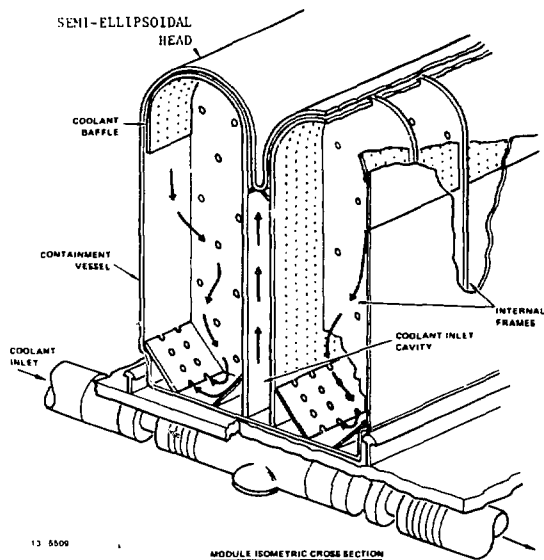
Selected blanket design configuration for Li-Pb breeder/coolant approach.
